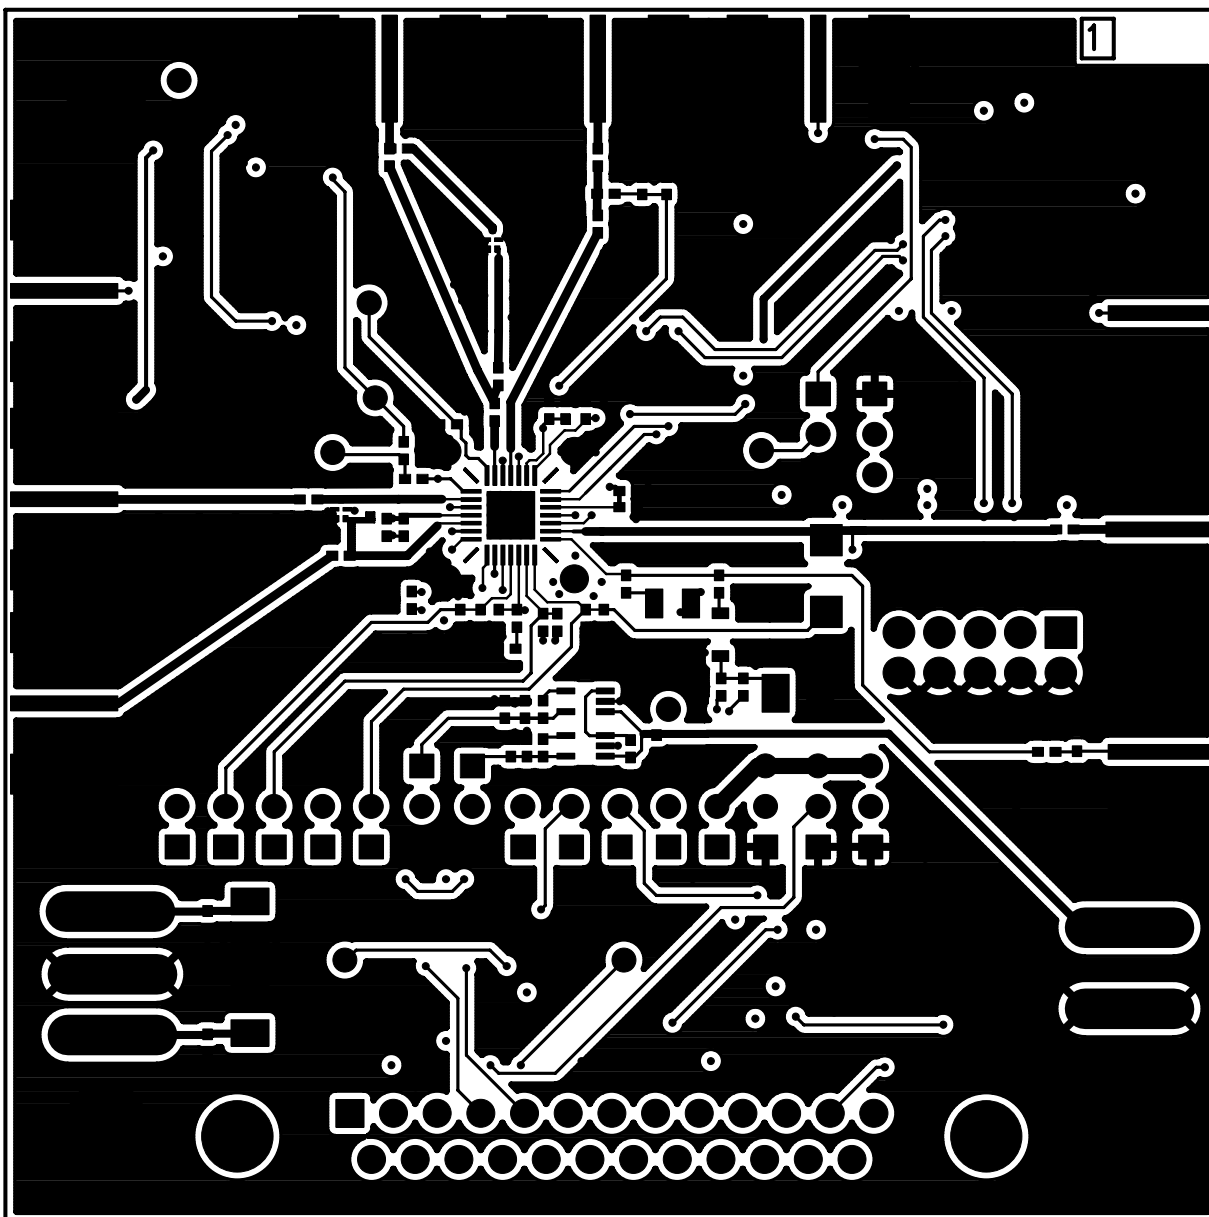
MAX2769/MAX2769B/MAX2769C EV Kit PCB Layout—Top Layer Metal
